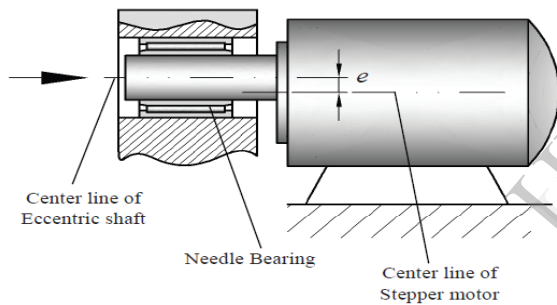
linear reciprocating motion device driven by eccentric shaft motor [1]
